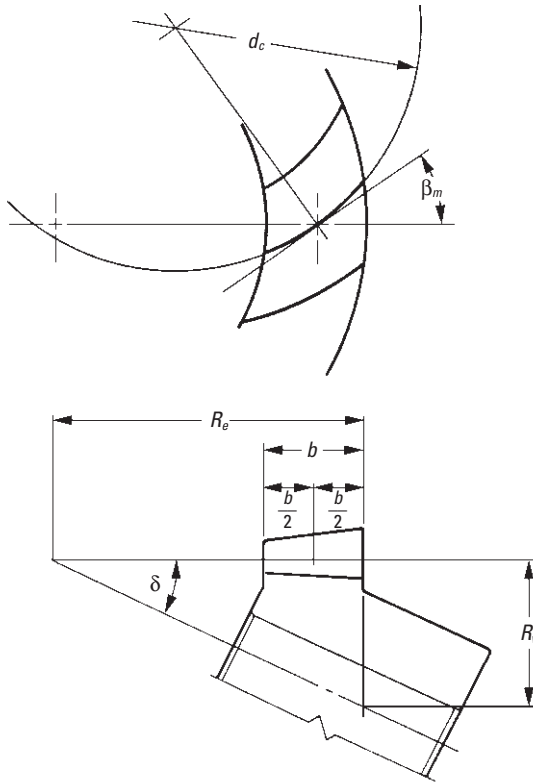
Spiral Bevel Gear (Left-Hand)
